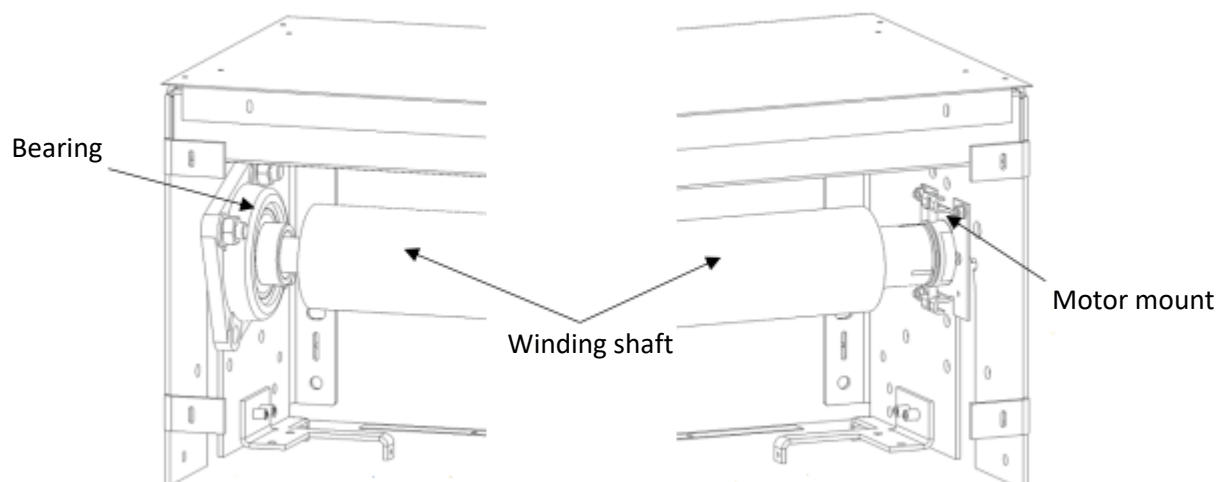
Installation of the winding shaft with a door width (bigger) > 4000 mm
